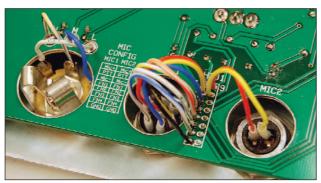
To minimize laborious point-to-point wiring, short jumper wires from front panel connectors solder to mating pads on the printed circuit board.
